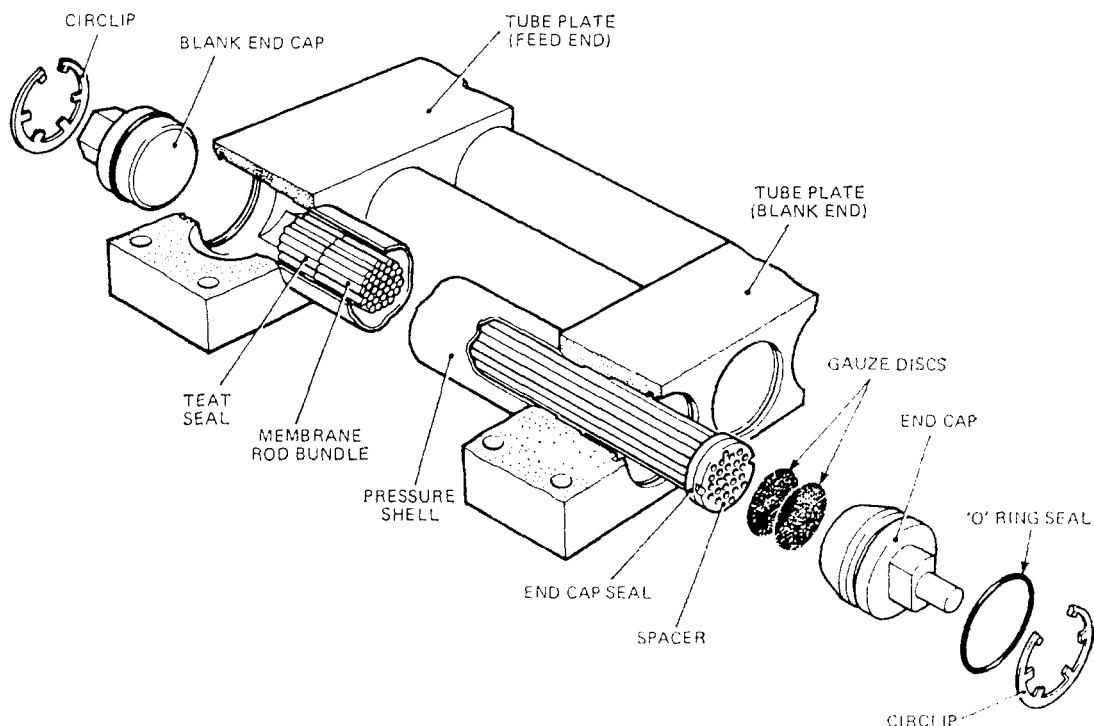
EXPLODED VIEW OF THE R3 MODULE
